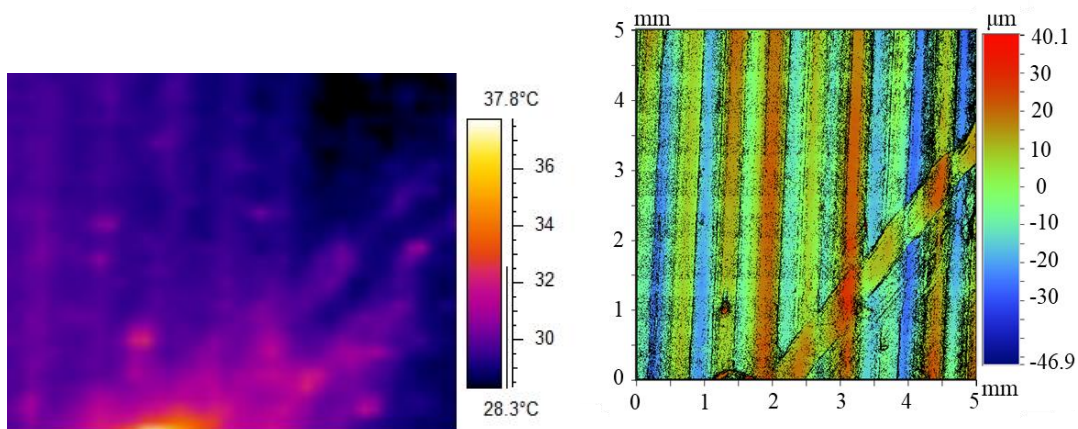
(a) Zoomed in IR image of the 3D printed part matching the dimensions of (b) the optical profilometry data of the surface of the 3D printed part.
